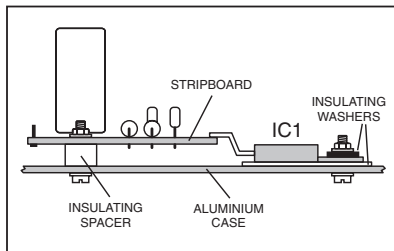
Suggested method of mounting the circuit board and regulator on the underside of the case cover.
